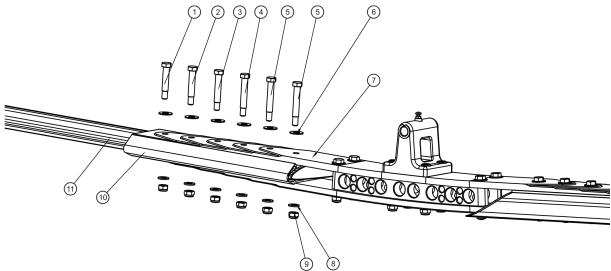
Assembly rotor - teetering parts (Effectivity: RS II)
